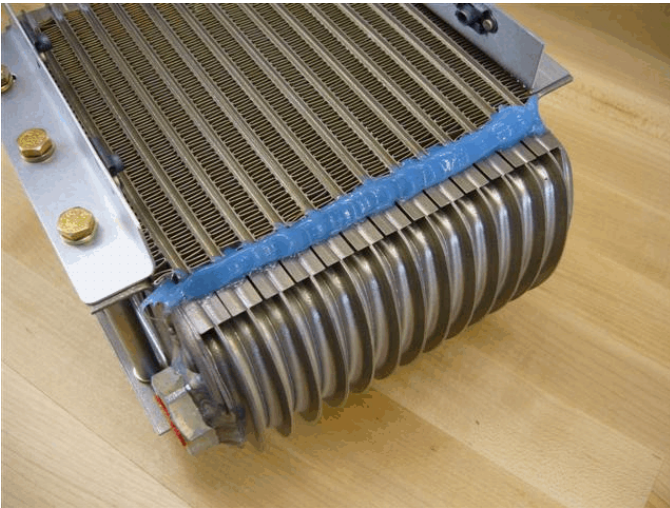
Fill the gap between the fin group and the end tanks with high temp RTV to form a gasket that will seal the bottom of the duct and the air gap completely.
